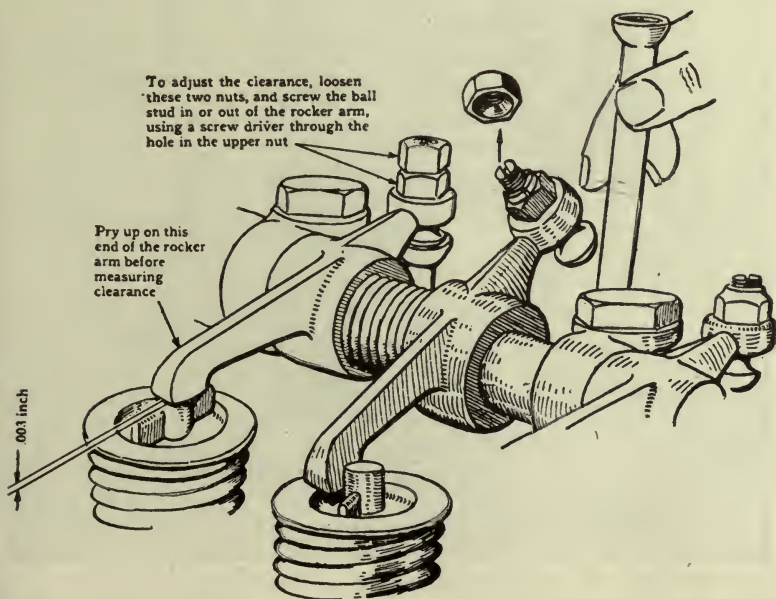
Adjusting Valve Clearance on Overhead Valves (National Sextet).
